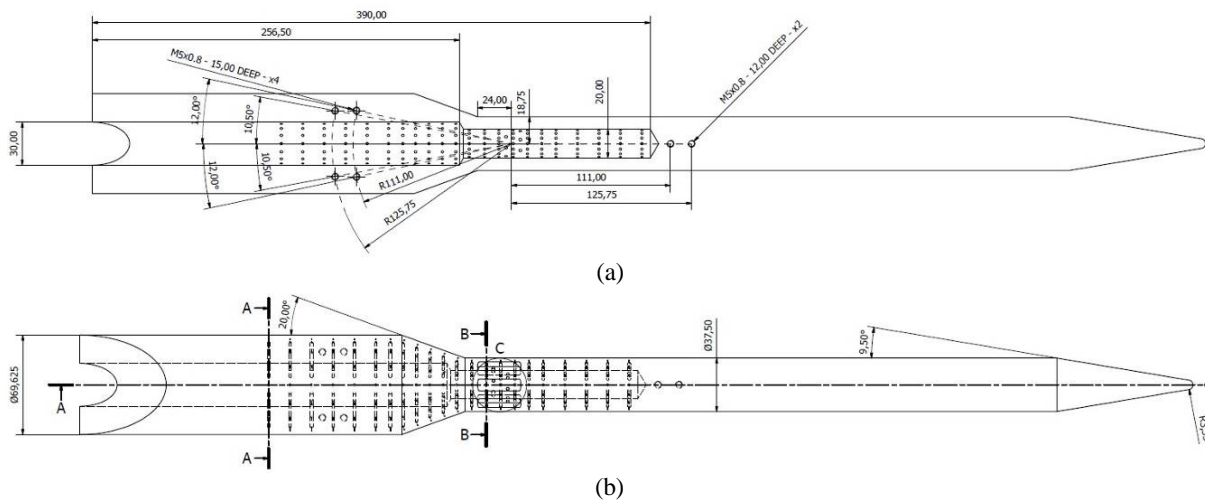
The model views: (a) inner part; (b) outer part, with 154 measuring pressure taps
